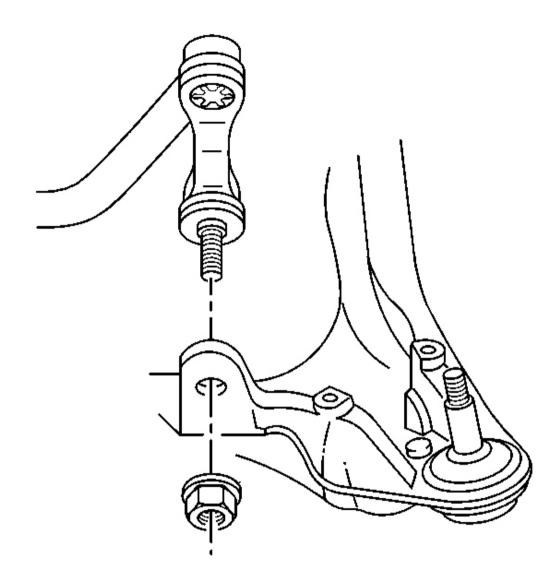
Stabilizer Shaft Link & Lower Control Arm Courtesy of GENERAL MOTORS CORP.
